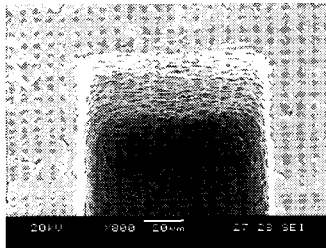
Micro cavity without bottom surface distortion. (92.0 \times 93.7 μm^2 cavity, 100 μm machining depth, and 479.1 sec machining time)
